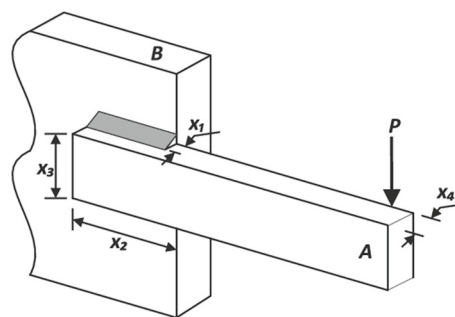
Welded beam design problem (Emami 2020)
